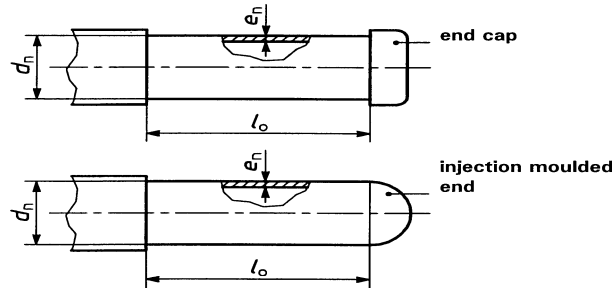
Free length,  $l_o$ , of injection-moulded test pieces
